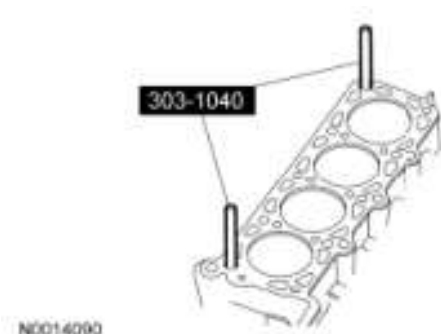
Identifying Cylinder Head Alignment Pins (303-1040)
